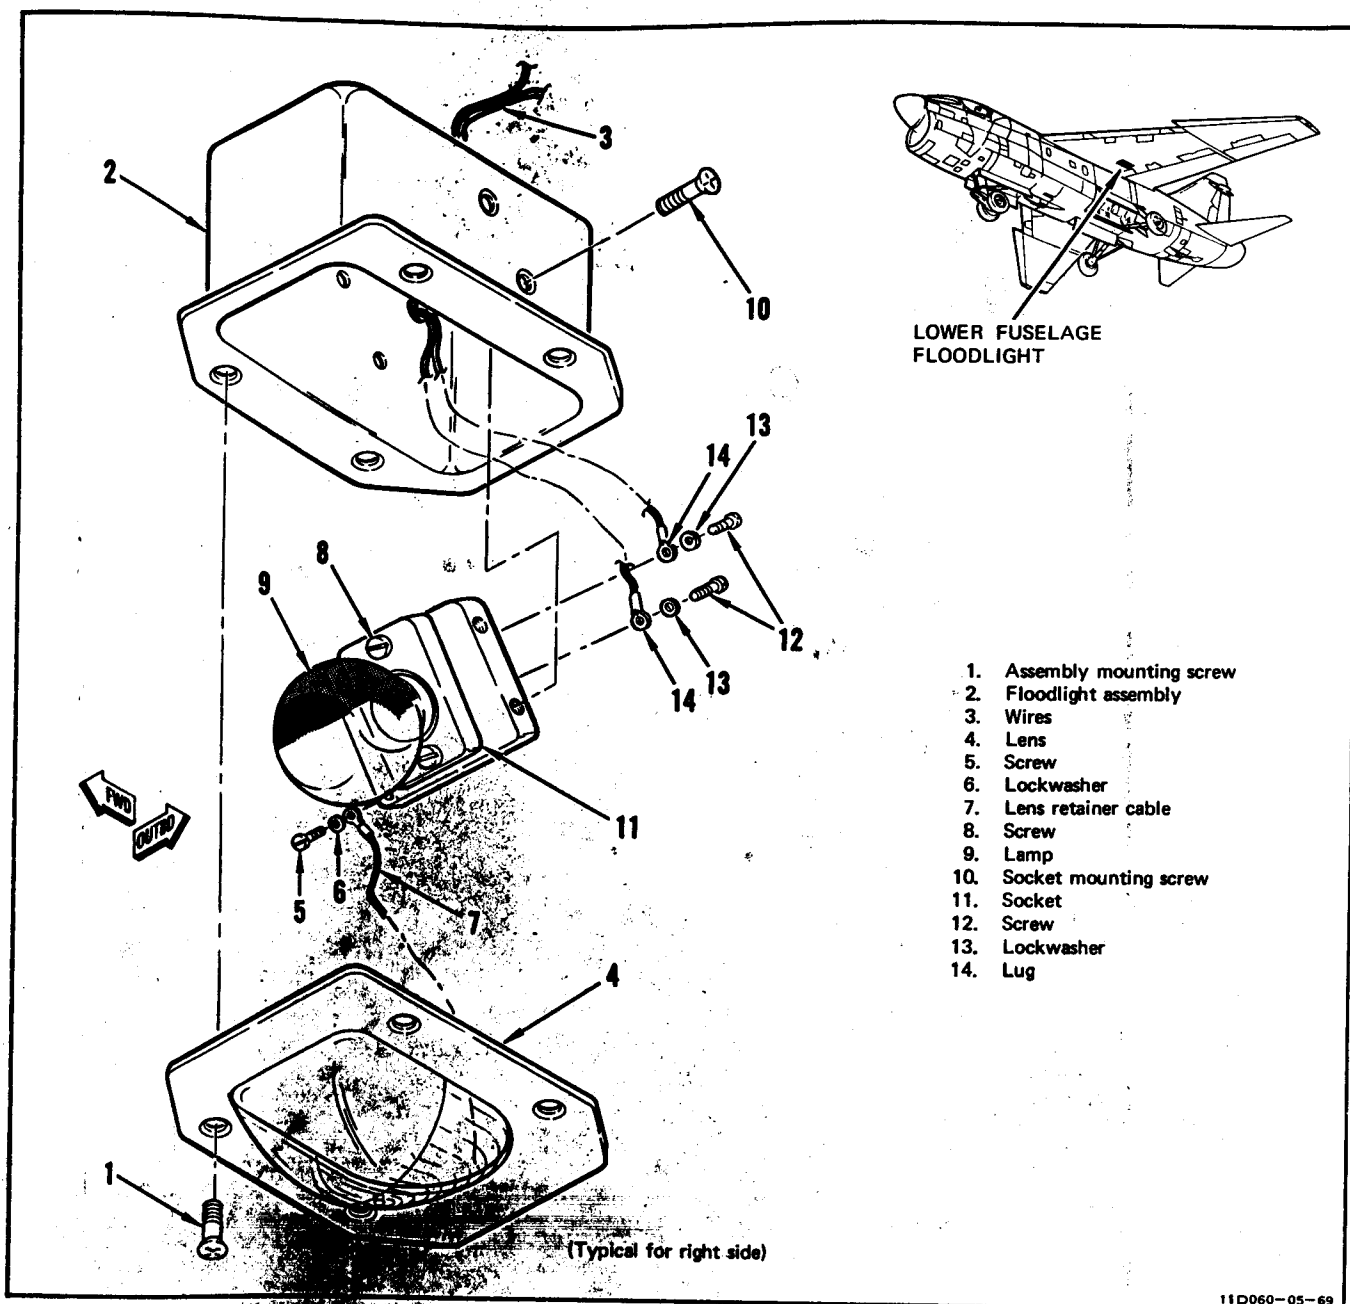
Fuselage Floodlight Assembly Removal and Installation
